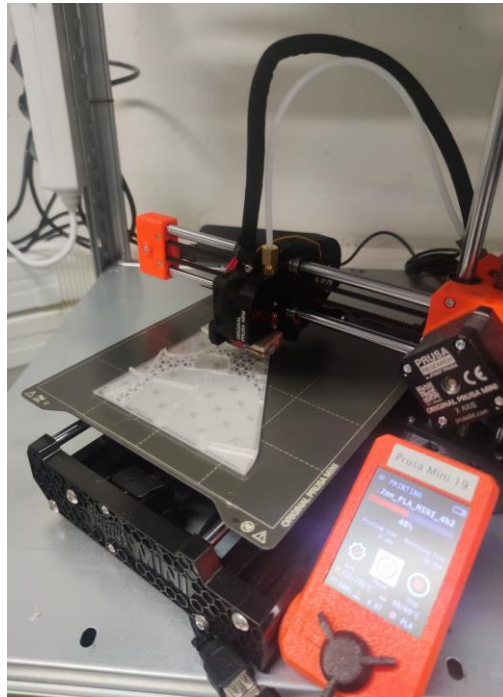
Prusa MINI+ 3D printing one of the parts of concept 2.
